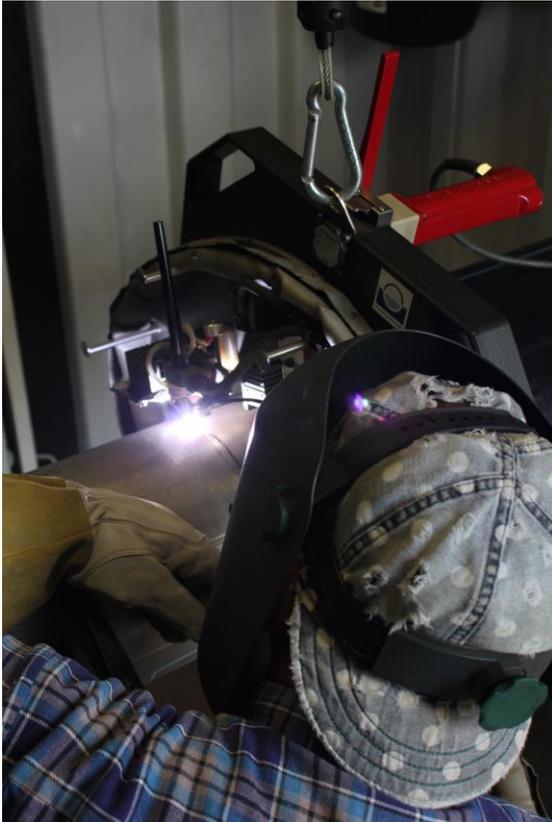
Mechanised orbital TIG welding of a Duplex pipeline
